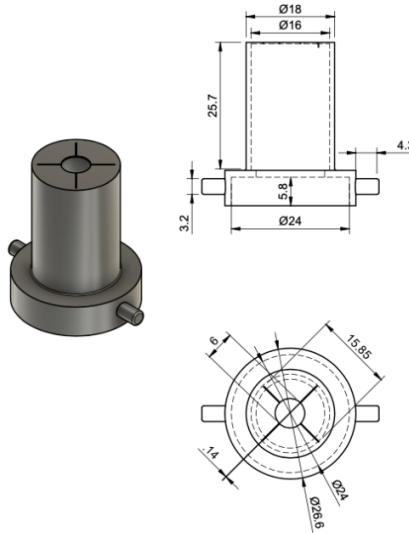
The plunger bracket CAD model illustrating the design and dimensions.
